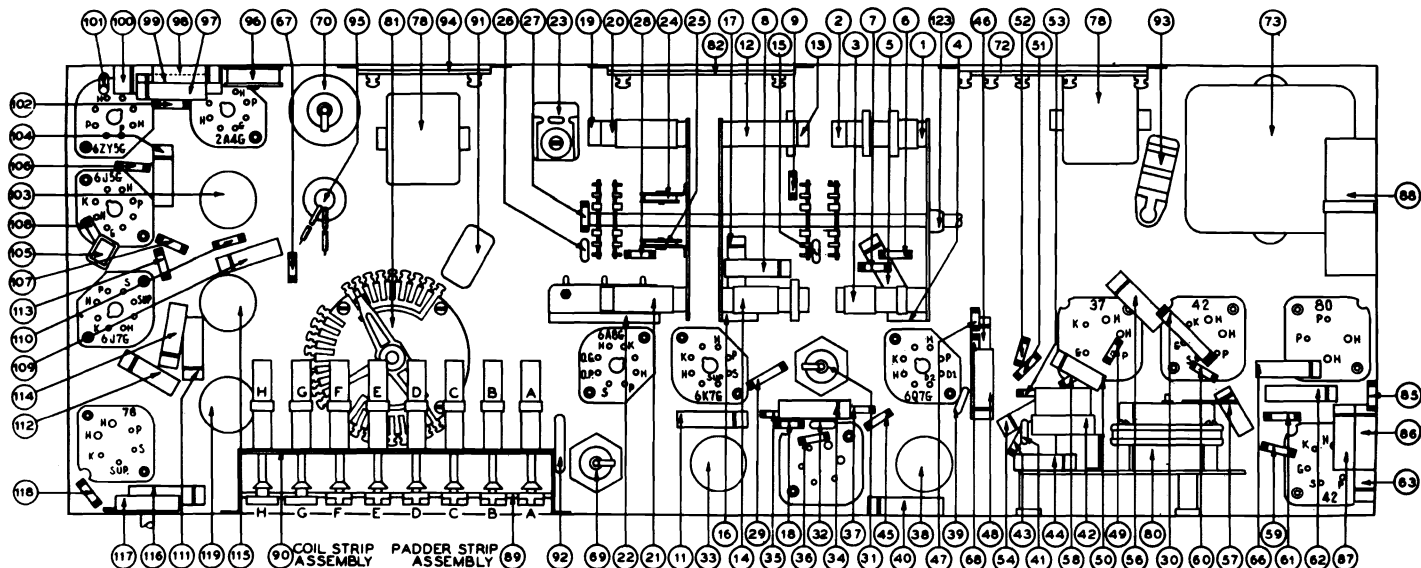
Model 39-116 Part Locations Underside of Chassis
